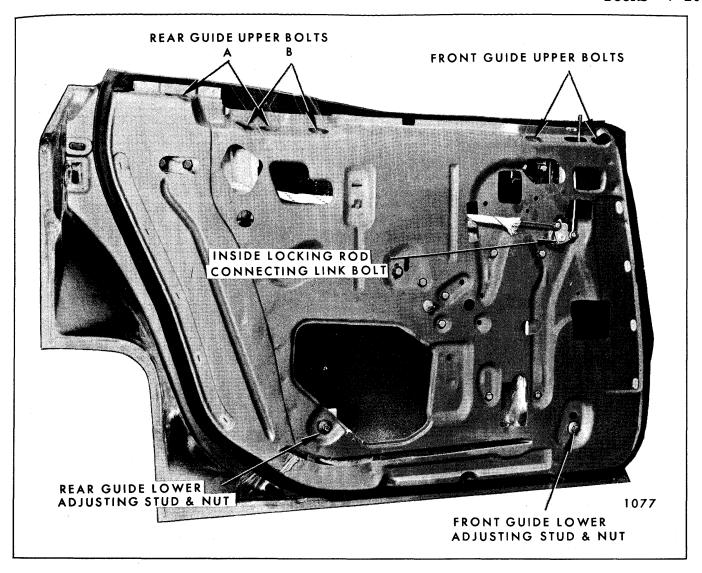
Rear Door Window Guides - "B & C-39 and C-69" Except 68069-68169 Styles
